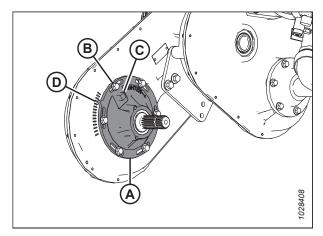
Completion Gearbox Chain Tensioner Cover
